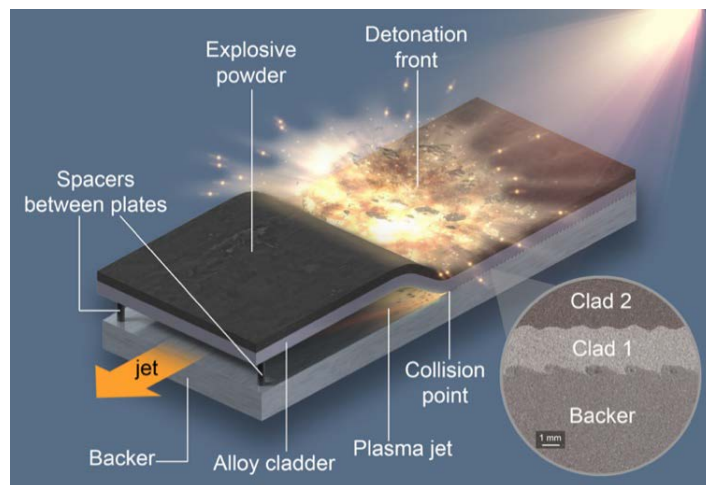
Mechanism of the explosion welding (EXW) cladding. Bond interface microstructure. Image from NobelClad
